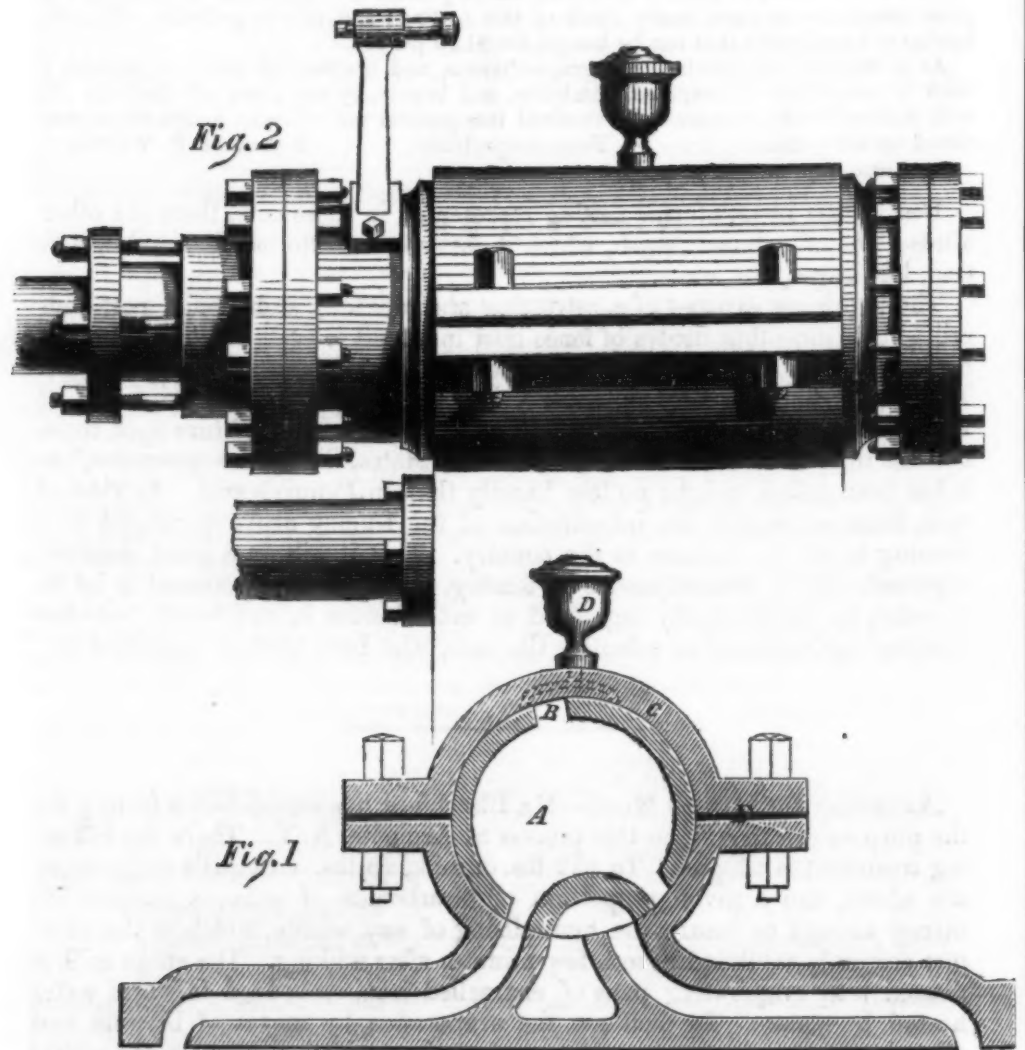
is a side elevation of the valve, with the inlet pipe attached, and the crank-pin, for oscillating the valve. Fig. 1 is a transverse vertical section of the valve and the steam passages of the cylinder of an engine. A represents the cylindrical valve, which forms a steam-box, with head and bottom like a cylinder. This valve extends to the outside of the valve-cover, C, and is oscillated by the eccentric rod, which is attached to the pin of the arm shown in Fig. 1. B is an opening in the roof of the valve, to counteract the abutting force of the steam on the cylinder face. D is an oil-cup, and there are channels cut in the valve to allow its whole surface to be lubricated. E is a layer of vulcanized india-rubber packing, to render the cover, C, steam-tight. In Fig. 1 the steam is exhausting from the steam-cylinder at the right-hand end, and the engine is taking in steam by the left-hand port and
